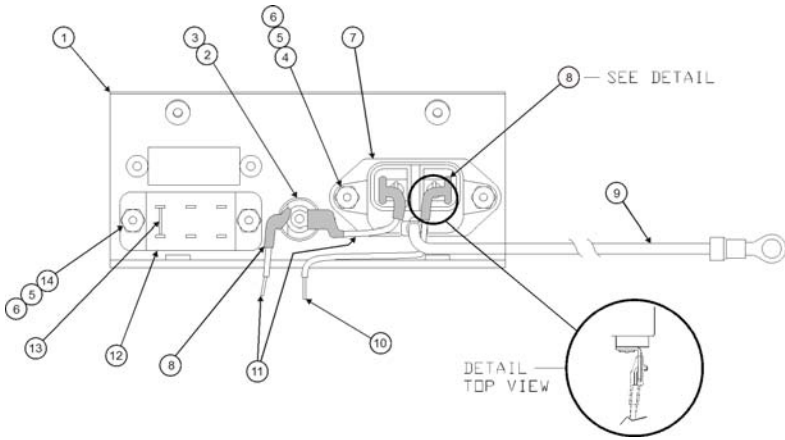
Rear Panel Assembly (SN 074100062 and below)
